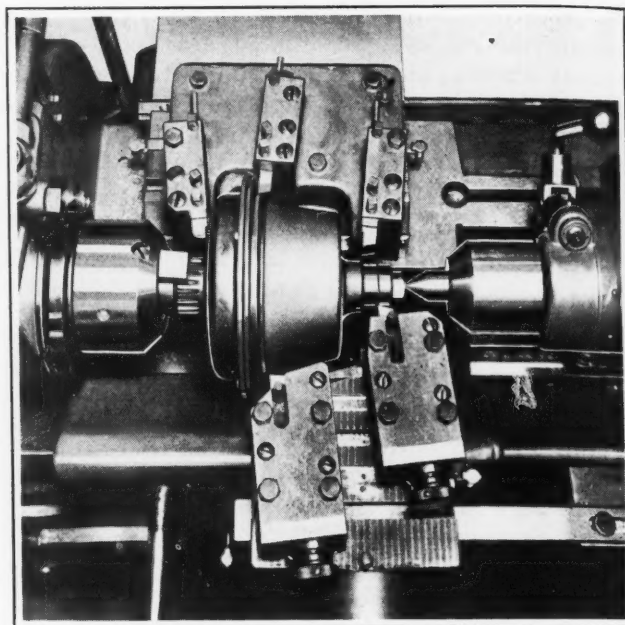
Assembled Differential Carrier and Tooling by which Five Surfaces are Machined
